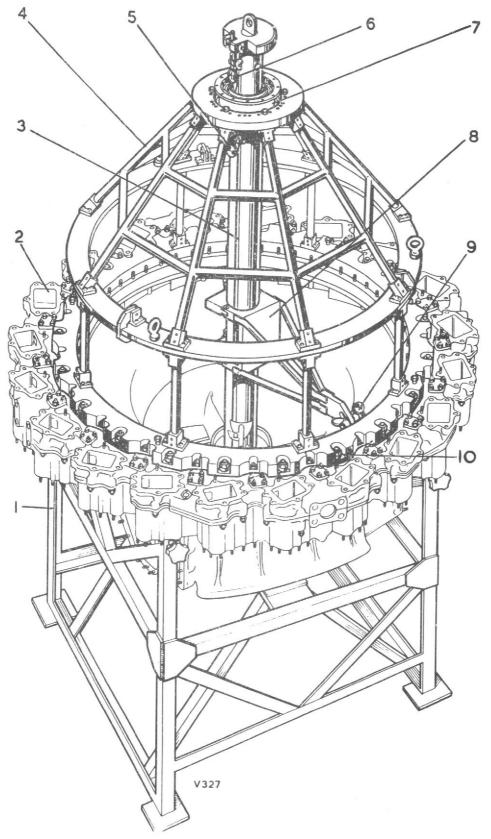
Diffuser casing and dummy centre casing assembled with mandrel in position
